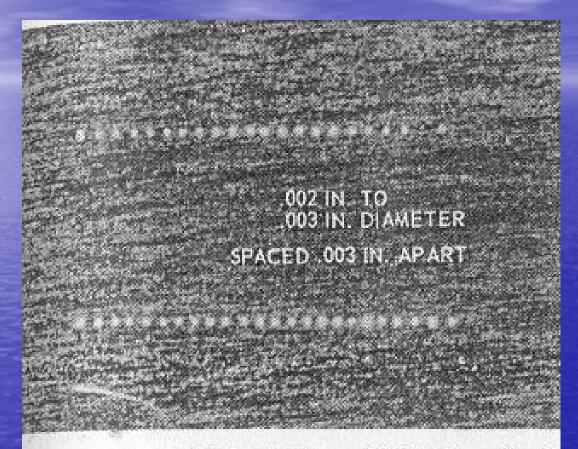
EBM drilling of .010 in. thick molybdenum. (Courtesy, Hamilton Standard, Division of United Aircraft Corporation)
